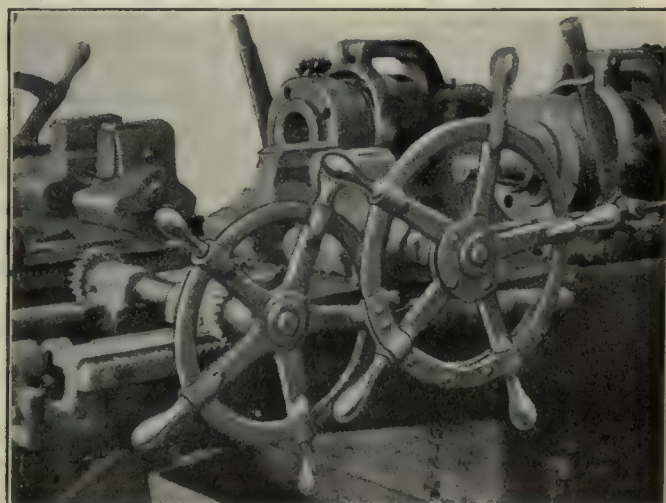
BOLT THREADING MACHINE MADE INTO A SCARFING MACHINE
